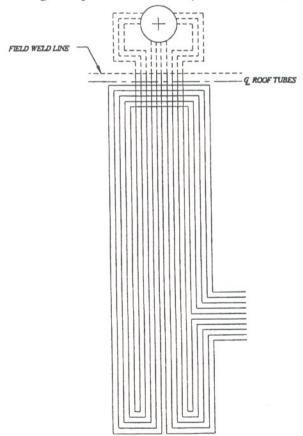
Reheater Outlet Assembly Replaced in 1993(57 Required)
